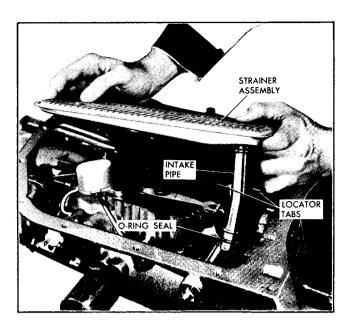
E-45 Removing Filter and Intake Pipe Assembly
